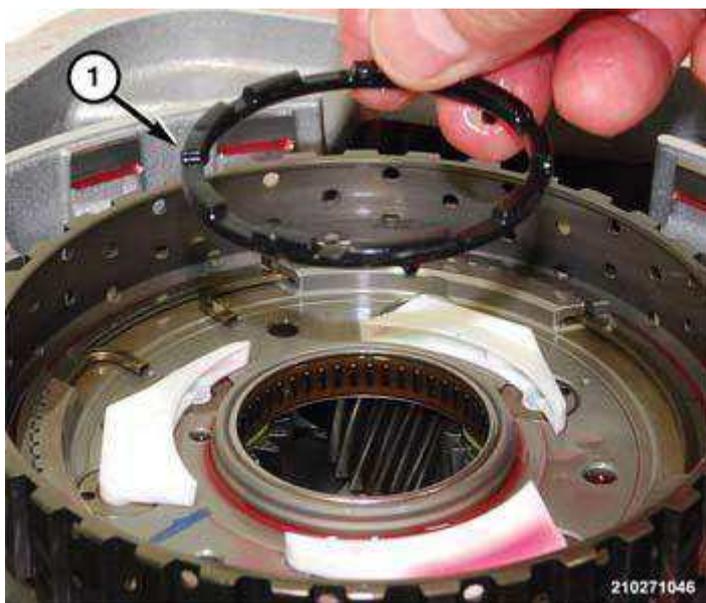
Thrust Washer & Planetary Gear Assembly Hub
